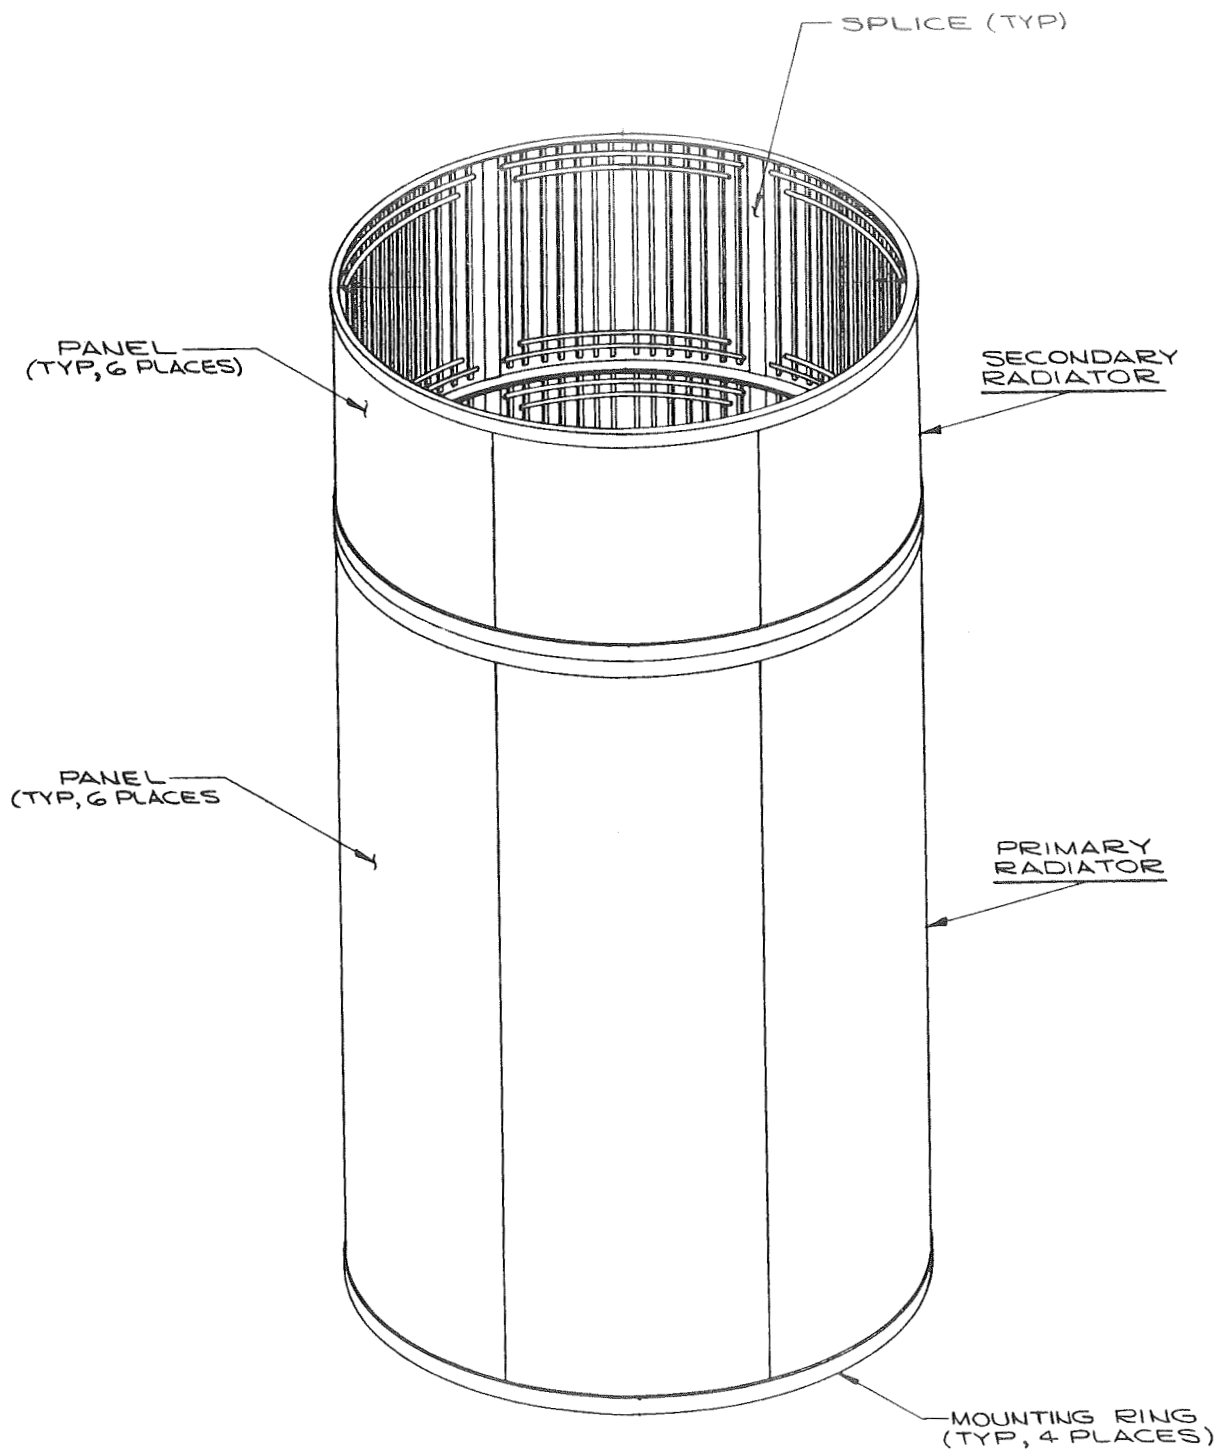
Conduction Fin Radiator Assembly Sequence Step 6
